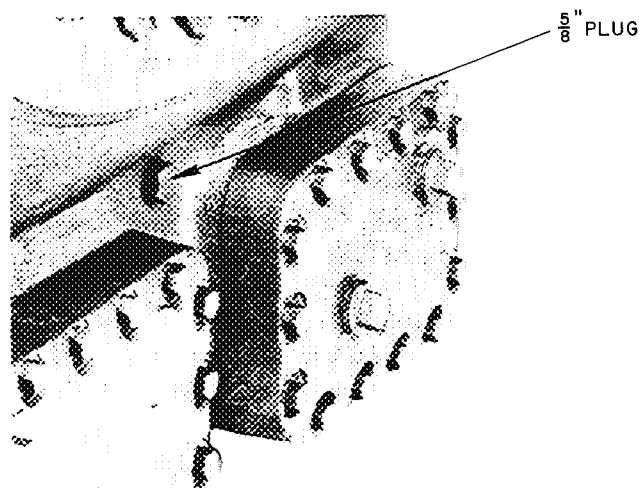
5H80, 86, 120, 126 Center Main Bearing Housing Setscrew Location
